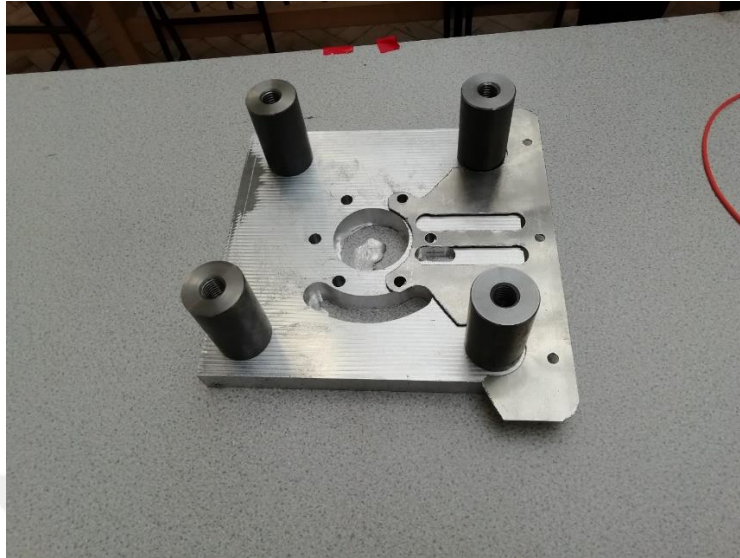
Incomplete Motor Mount Plate with Windshield and Spacers
